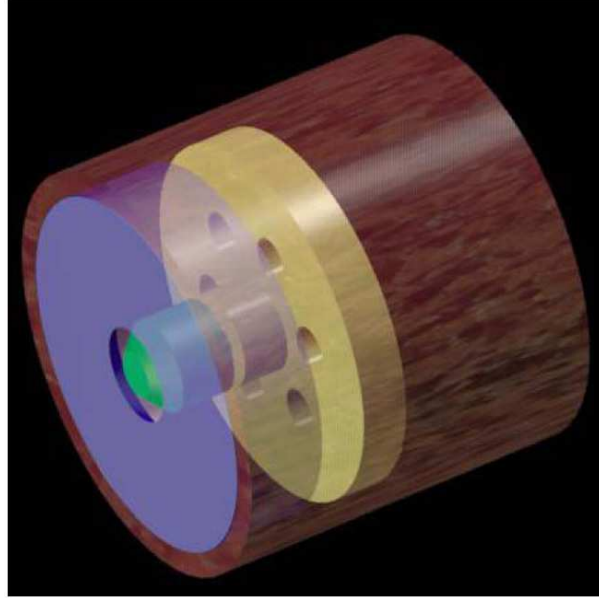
Dual-actuated hybrid enlarged needle valve [24].
